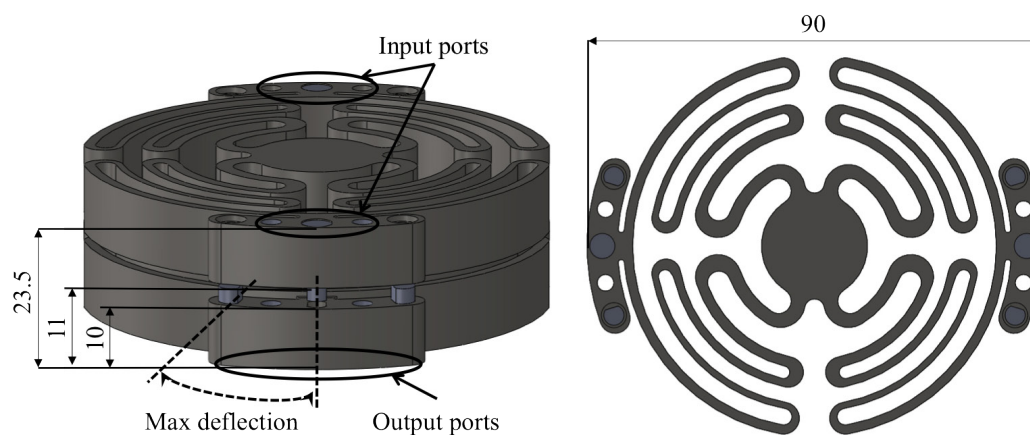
3D and frontal views of the second version of the springs pack implementing a serial configuration of two equal torsional springs. Input and output ports and maximum deflection allowed by the mechanical hard stops are highlighted. Dimensions of the springs pack: 90 mm (external diameter) and \times 23.5 mm (thickness).
